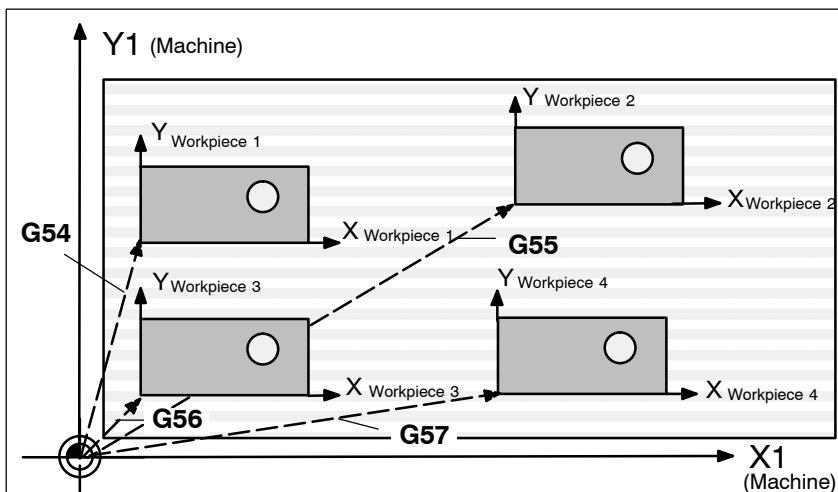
Various workpiece clamping positions when drilling/milling
